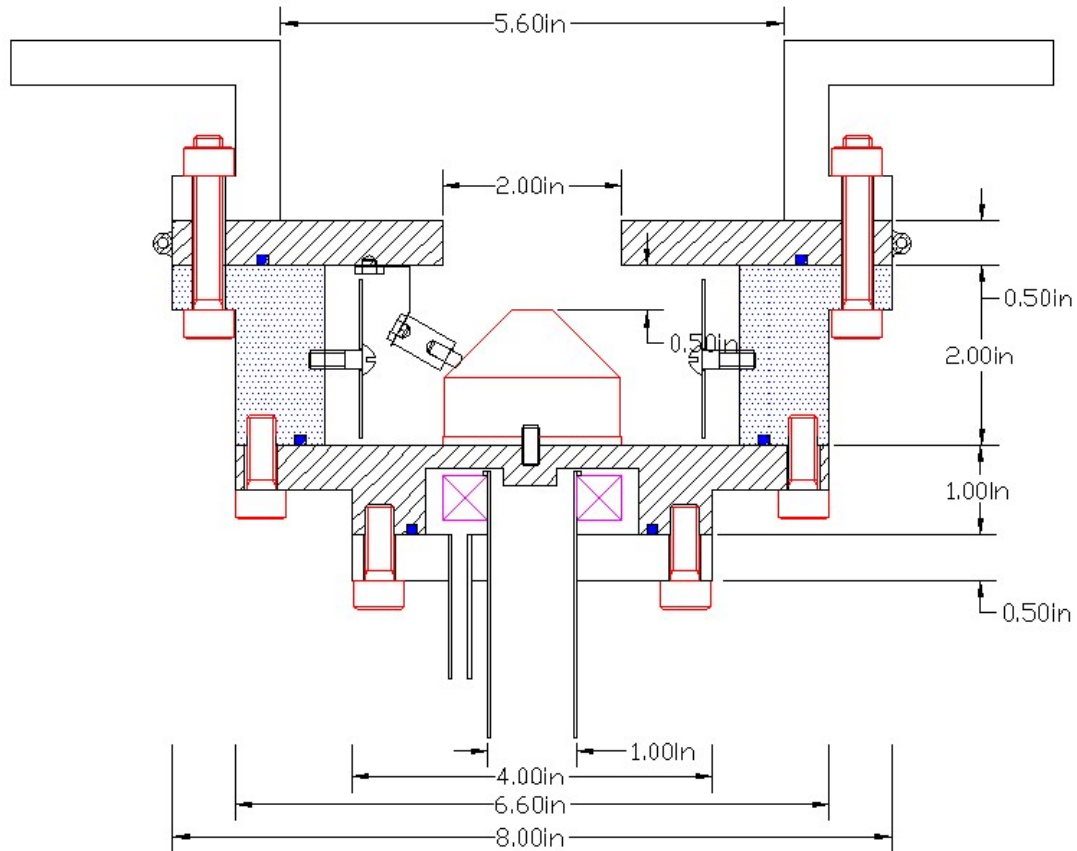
Preliminary outline drawing of DC arc source; the final drawing can be found at LBNL server of the Engineering Division.
